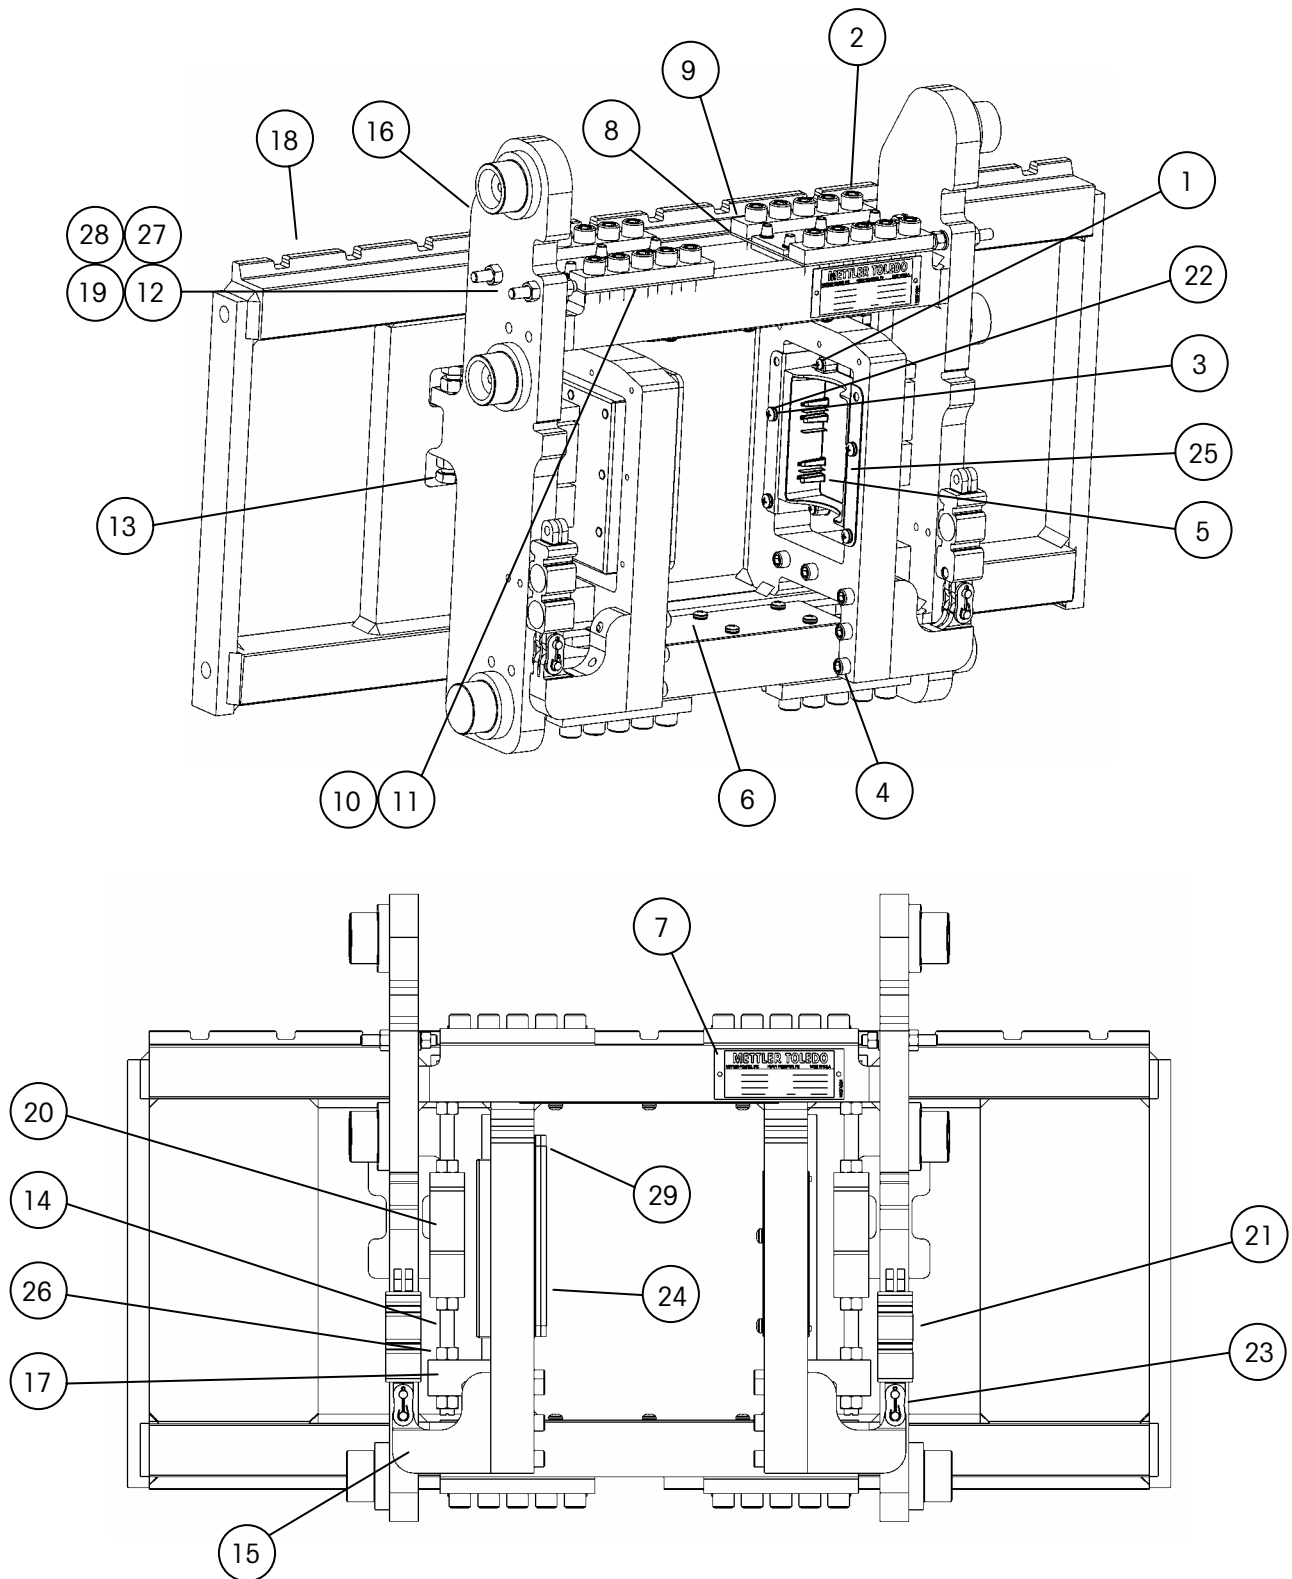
Forklift Scale Carriage Assembly (Simplex Version)
